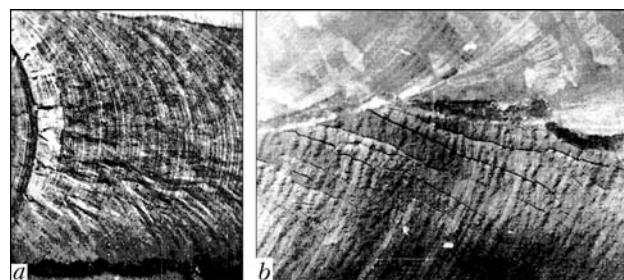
Appearance of specimens of steel X23N18 with solidification cracks in weld metal (a) and HAZ (b)
